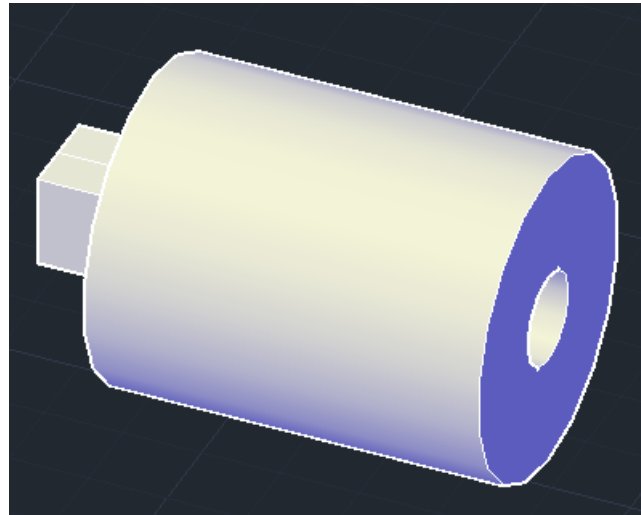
North West Isometric View of the Sleeve designed for the Shaft of Motor and Brushes
